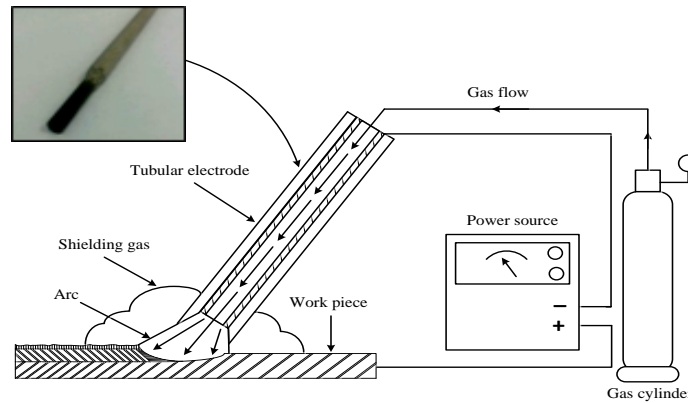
Tubular welding technique and fluid flow in the tubular welding electrode
